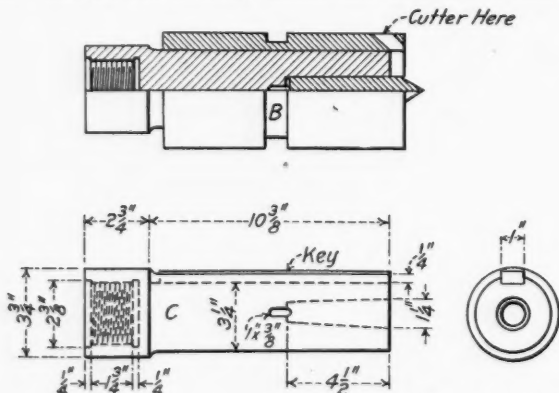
Tool for Turning Tumbling Shaft Journals. Dailey.
